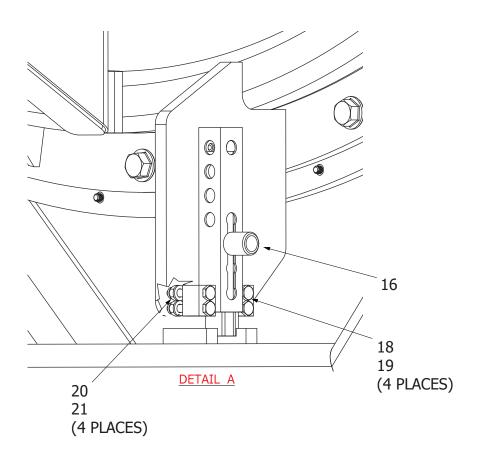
AGSE-E21507-S01 Cradle Assembly
